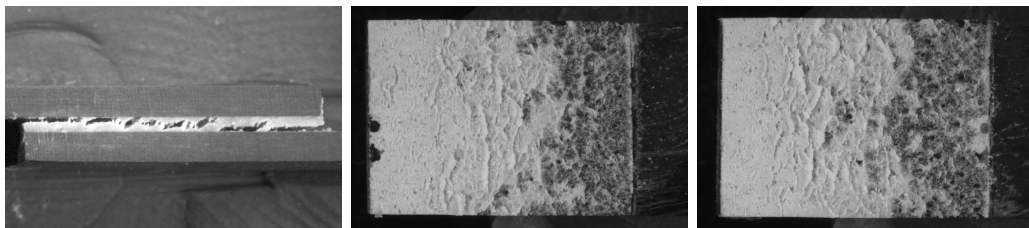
Side view of the broken CFRP-CFRP SLJ specimen (left) and fracture surfaces (middle and right).
